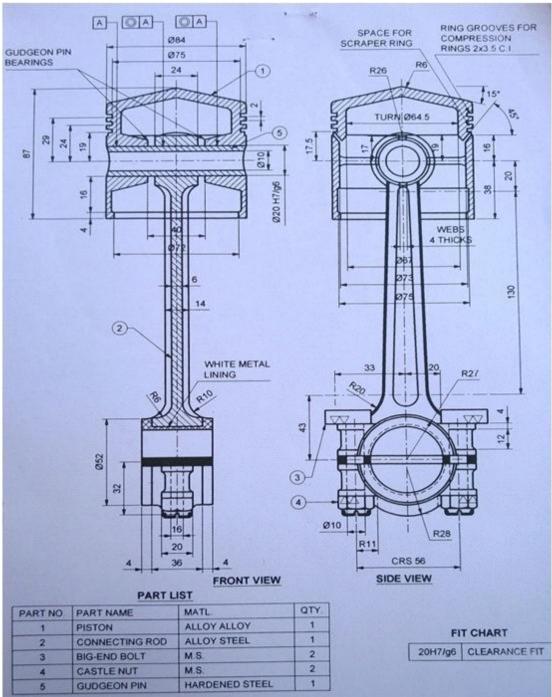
Shows the sectional front view, top view and sectional side view of an assembly of the piston and
